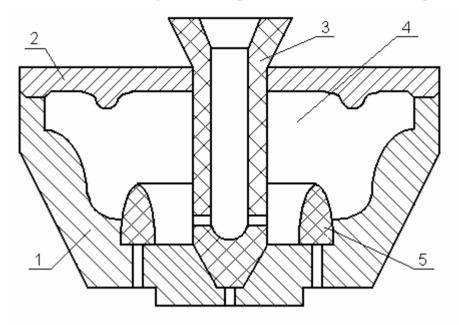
Metal mould with horizontal split: 1 – mould bottom half; 2 – mould top half; 3 – central sand core; 4 – mould cavity; 5 – bottom ring core
